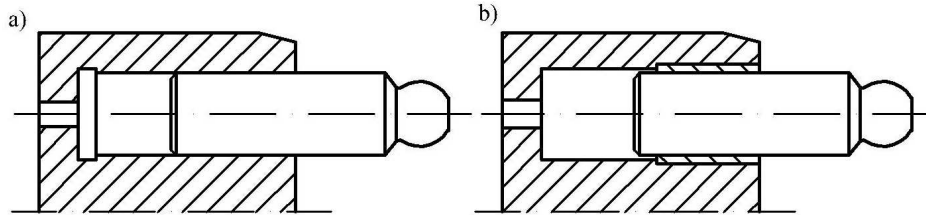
Piston moving in: a) sleeveless cylinder, b) sleeved cylinder
